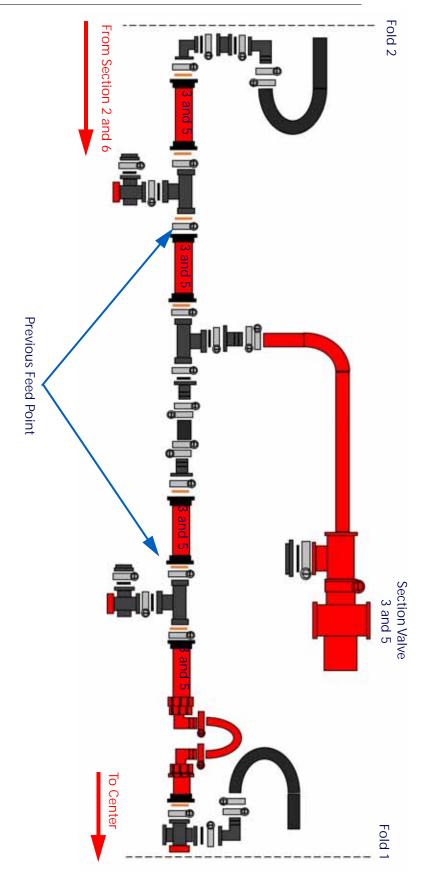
Inner Boom Fold 2 Example for 7-Section (135') Boom
